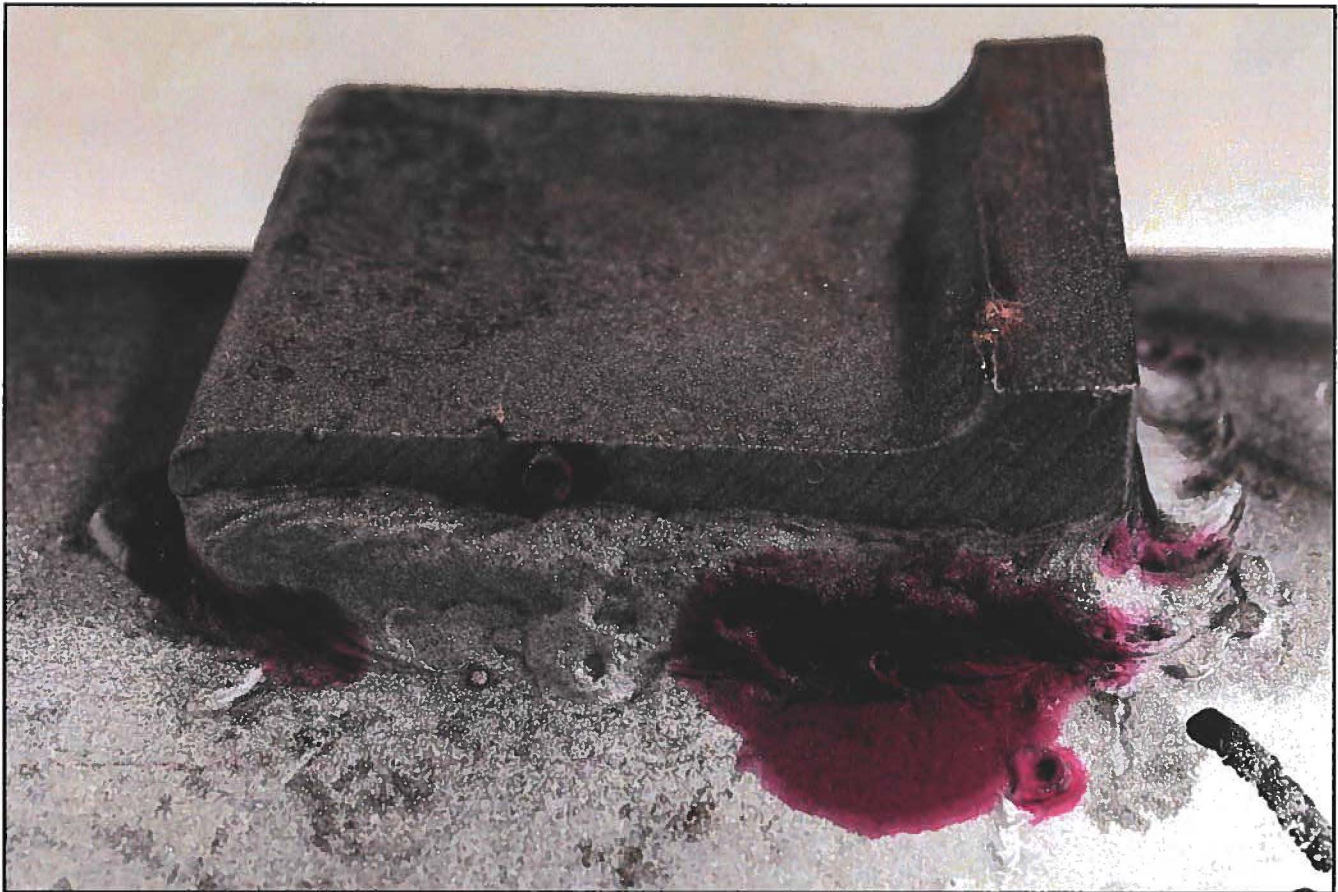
Image of the Lug A2 exterior top welds after dye penetrant media had been used during inspection.
